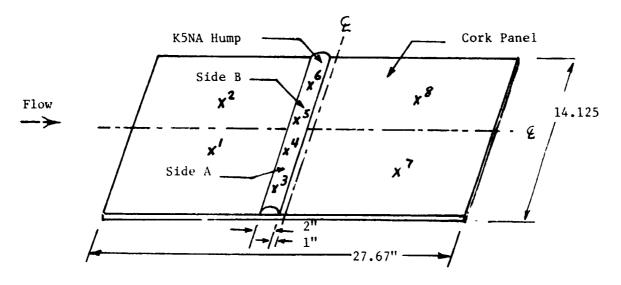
Sketch Showing Dimension of Typical Panel (Not to Scale)
